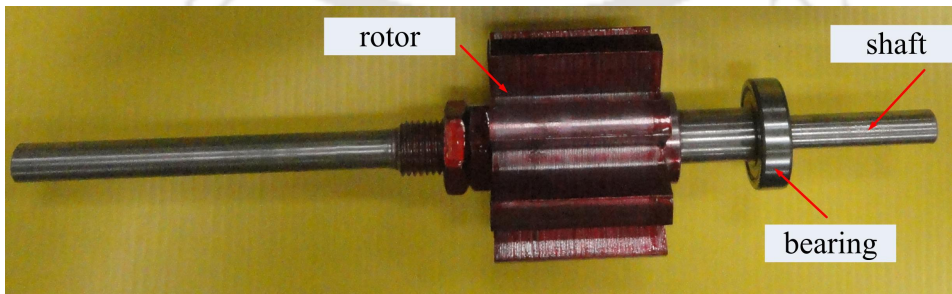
Rotor and shaft with one side bearing for test rig II
